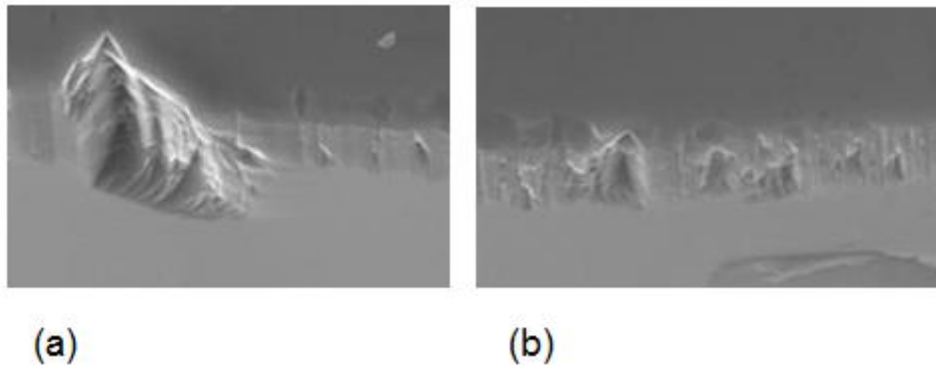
Closer images of (a) the large area of damage on the leading edge and (b) the area of many smaller fractures closer to the tip of the tool. (Tool S65317).
